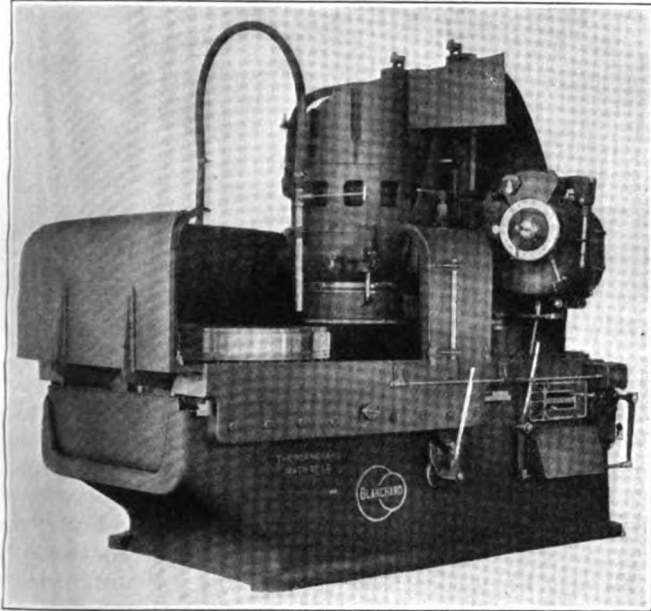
BLANCHARD HIGH-POWER GRINDING MACHINE
